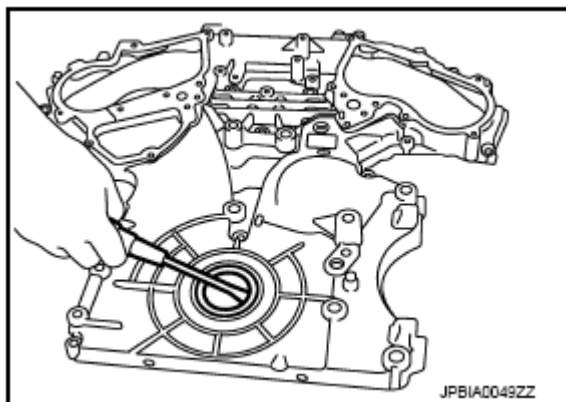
Removing Front Oil Seal From Front Timing Chain Case Using Suitable Tool
